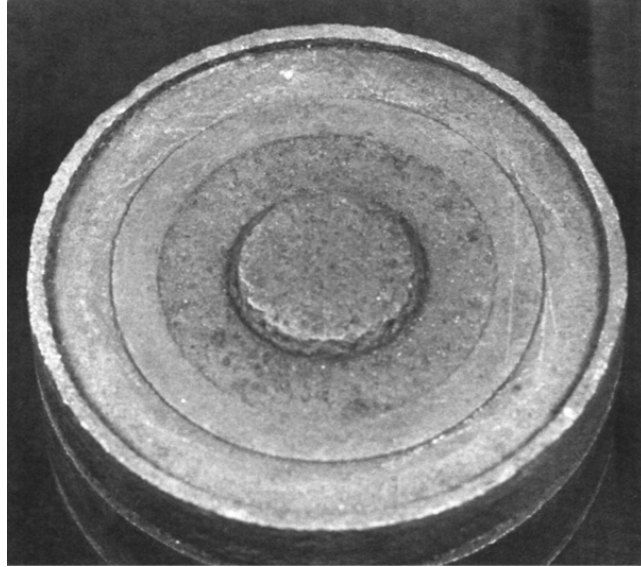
Acid Corrosion in Carbon Steel Bonnet Caused by Leaking Seating Surfaces
